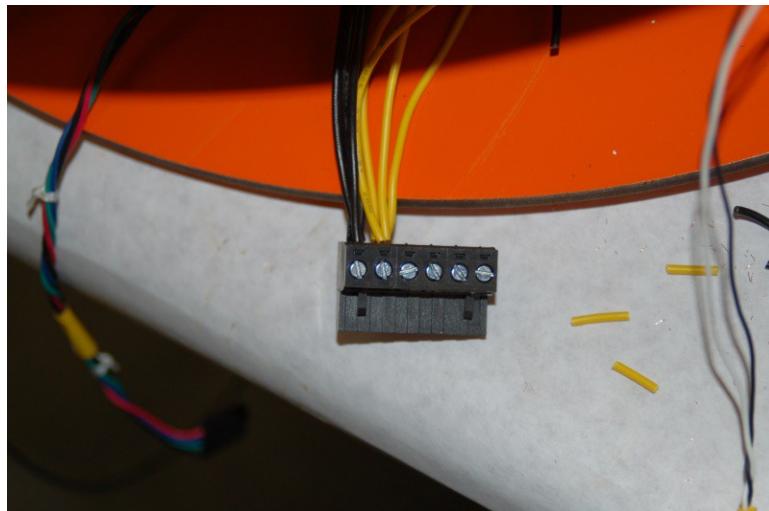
Installing the heated bed power wires into the terminal block connector.
